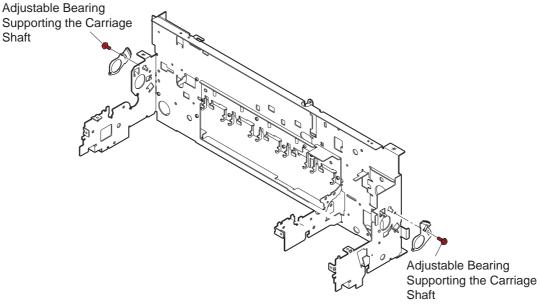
Adjustable Bearings Supporting the Carriage Shaft
